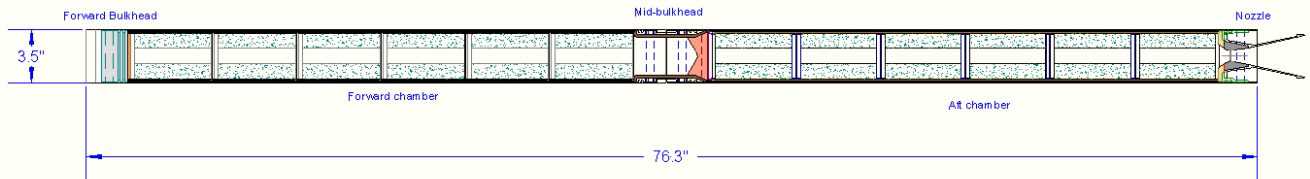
Basic dimensions and components of the *MiniSShot* motor assembly
